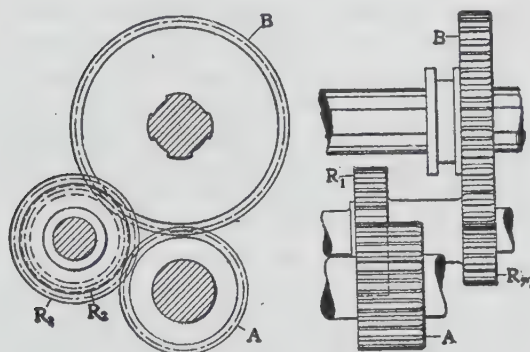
REVERSE GEAR WITH TWO IDLERS.
